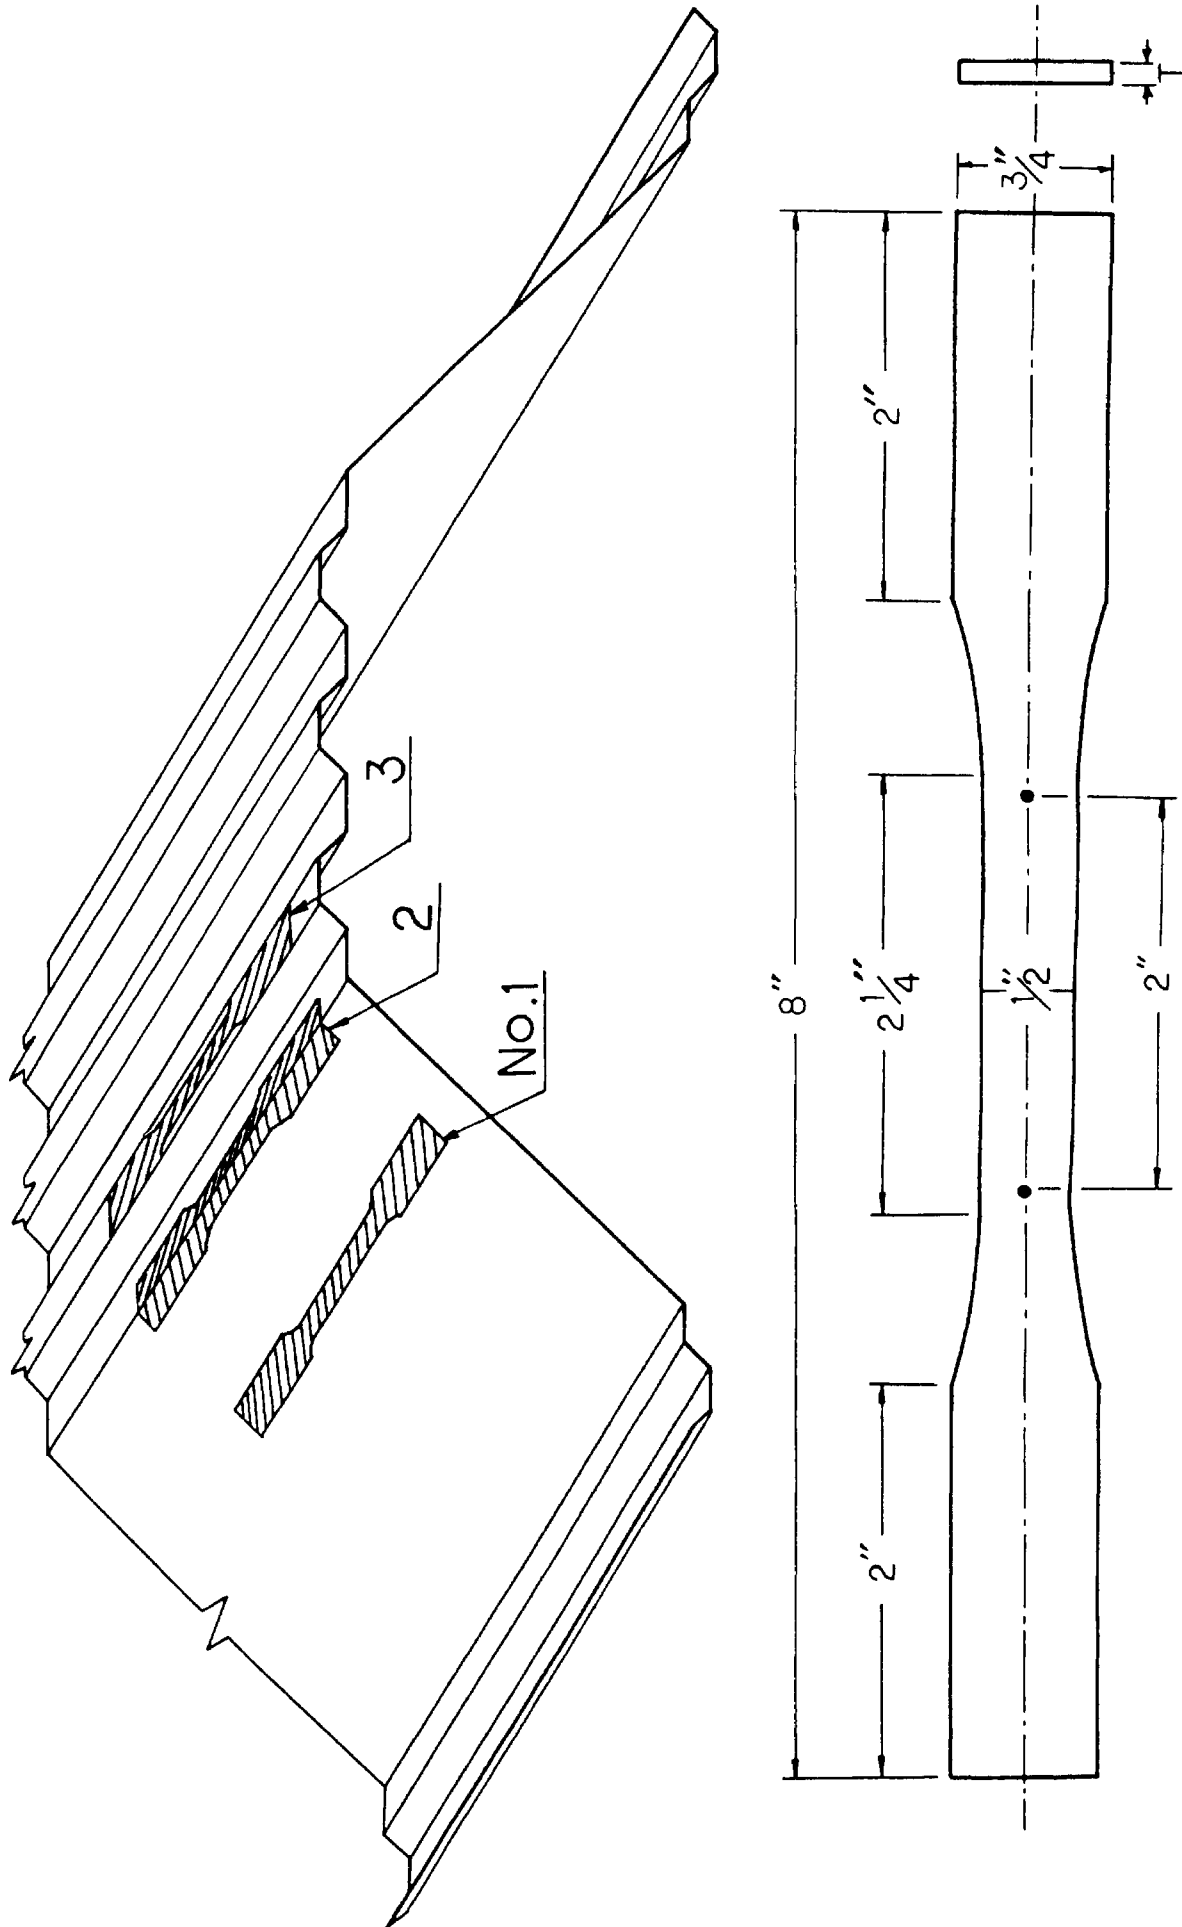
DIMENSIONS & LOCATION OF COUPONS
